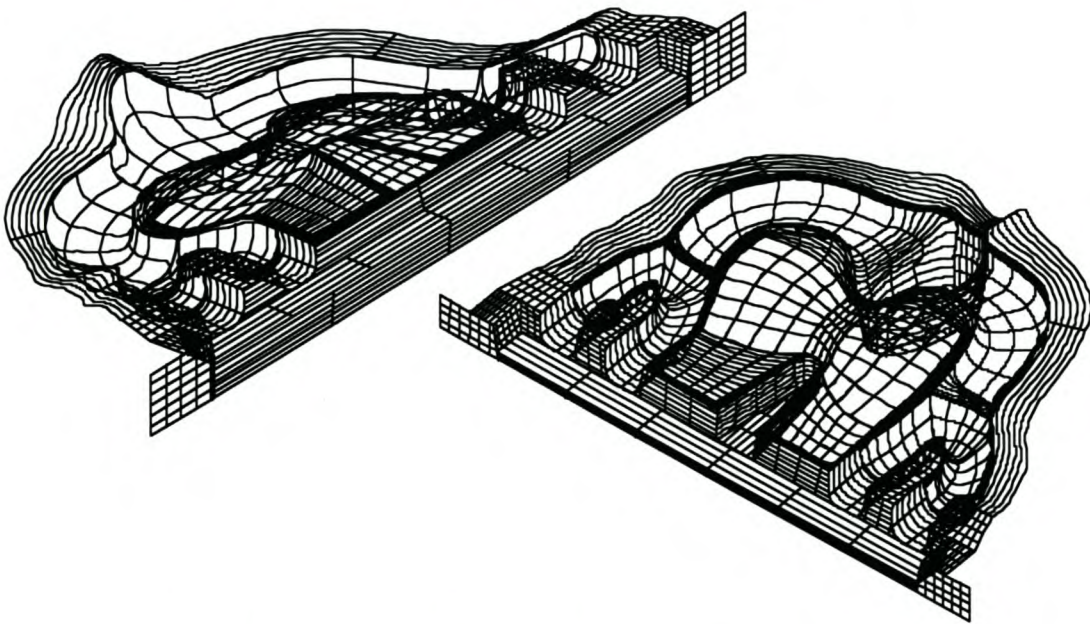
CAD Drawing of the Reverse Engineered Core Box.
